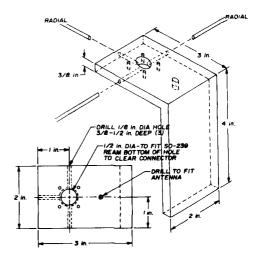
Construction of the antenna base. Horizontal radials are installed and welded in place.
